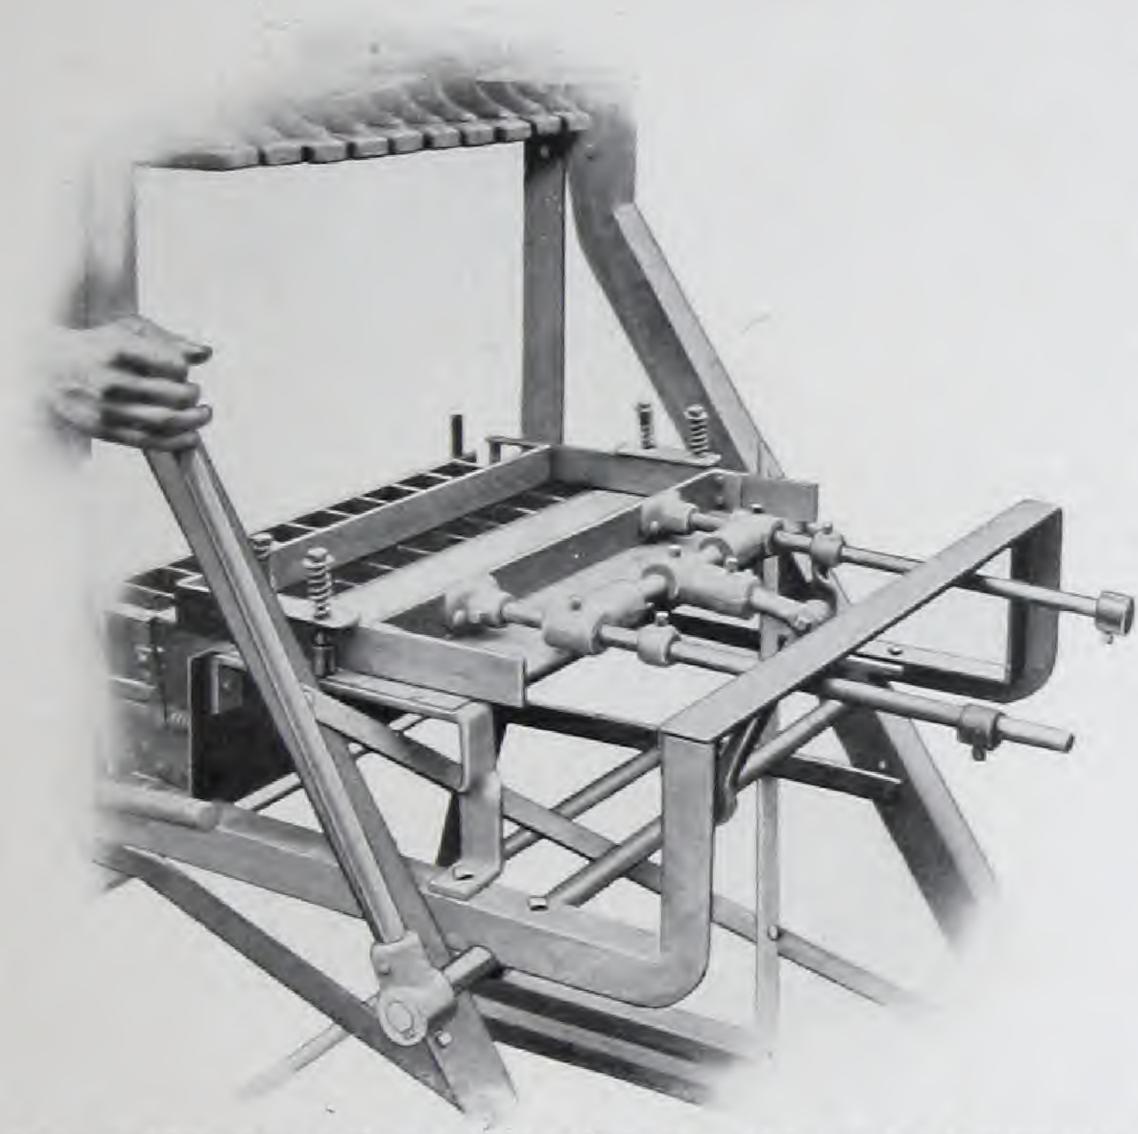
EVERY "CRESCENT" MACHINE HAS THIS MECHAN-ICAL HOPPER, FINISHER AND STRIPPER
